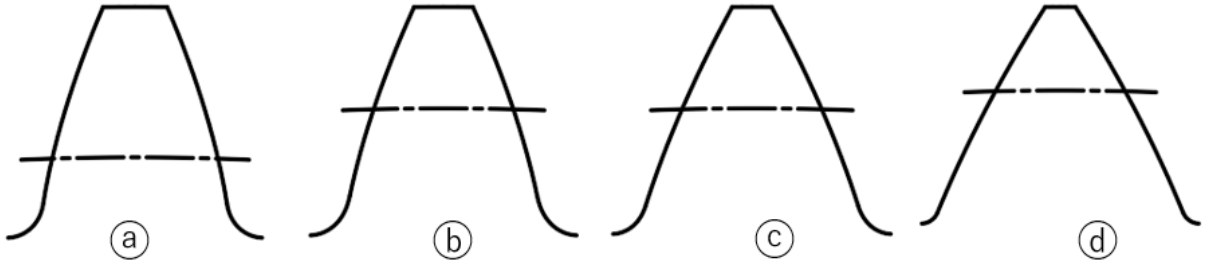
Gear geometries without profile shifting in Z58 pinion gear. (a) 15° gear geometry. (b) 20° gear geometry. (c) 25° gear geometry. (d) 30° gear geometry.
